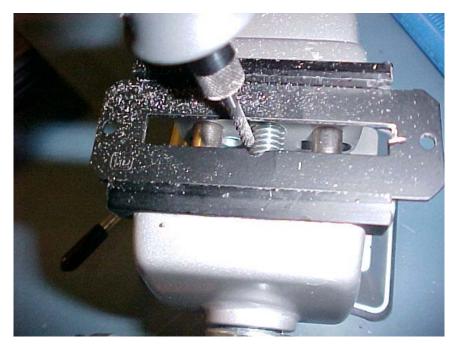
Adding Cut-Out for LED with Dremel Tool
